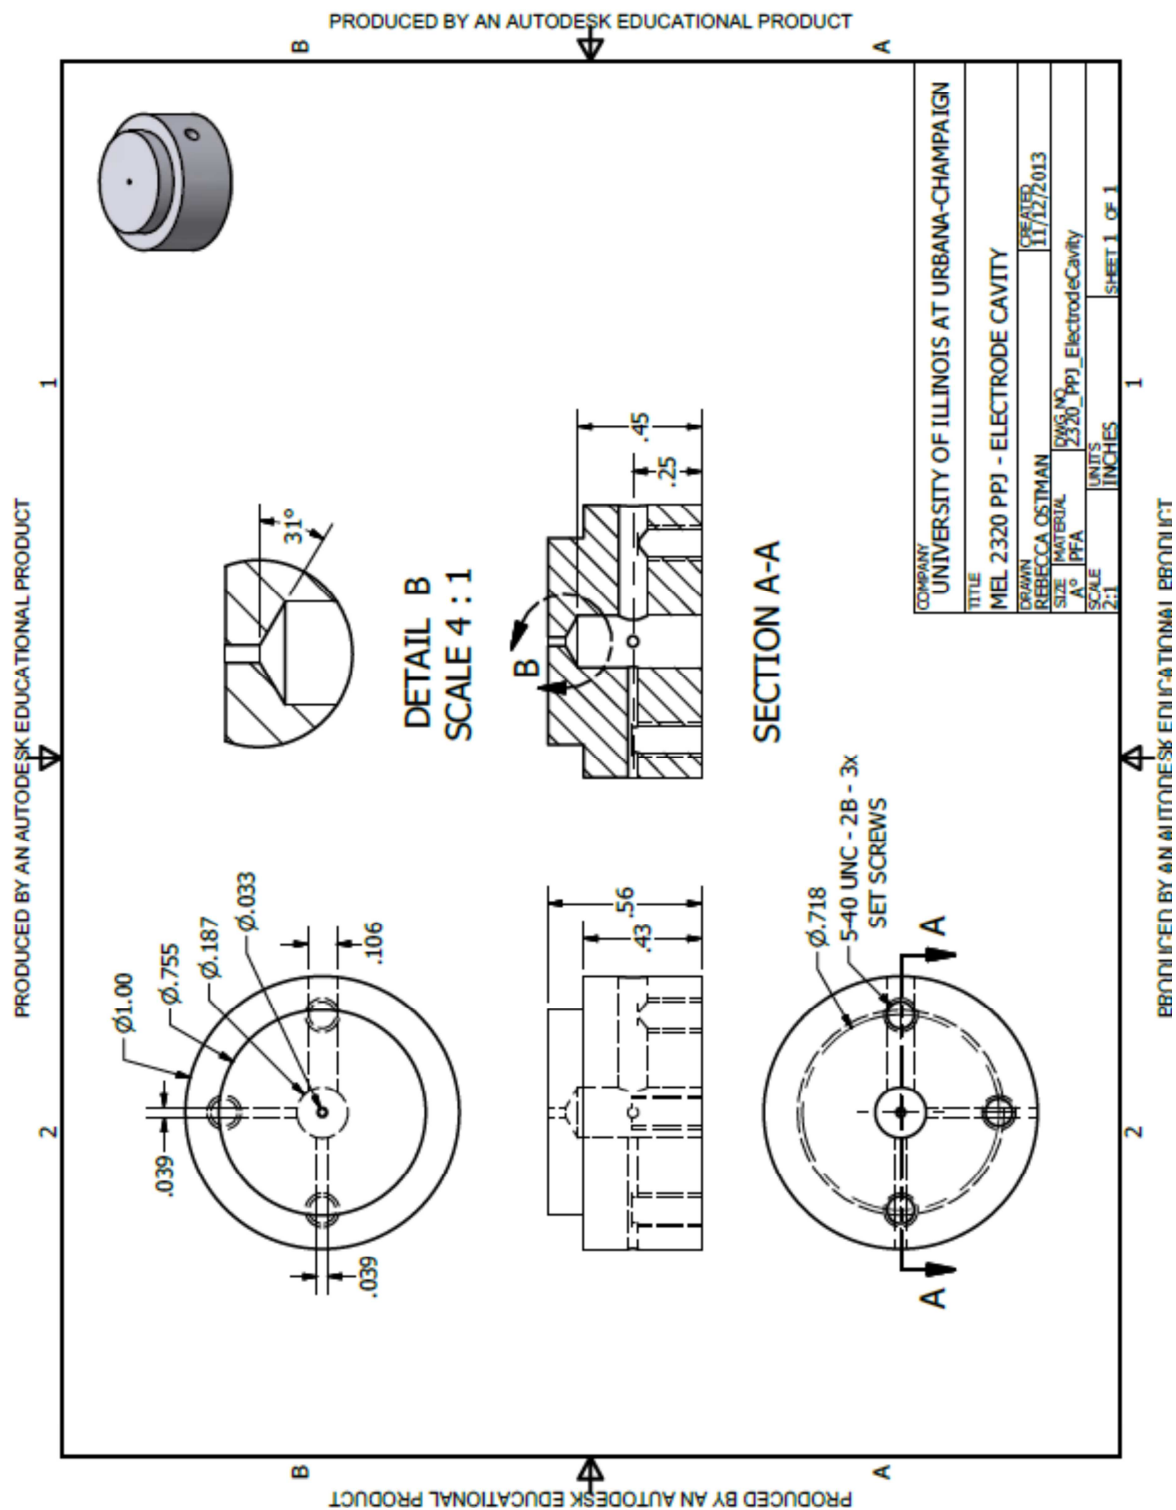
Drawing and specifications for the PPJ cavity and electrode housing.
